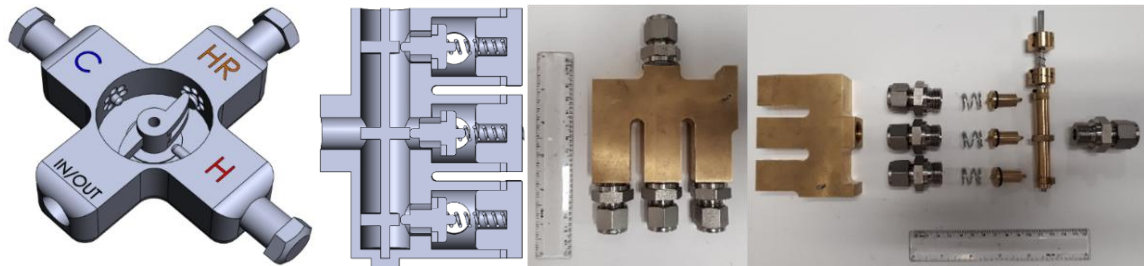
a) CAD representation of the two investigated configurations, b) Assembled and exploded view of the linear configuration.
